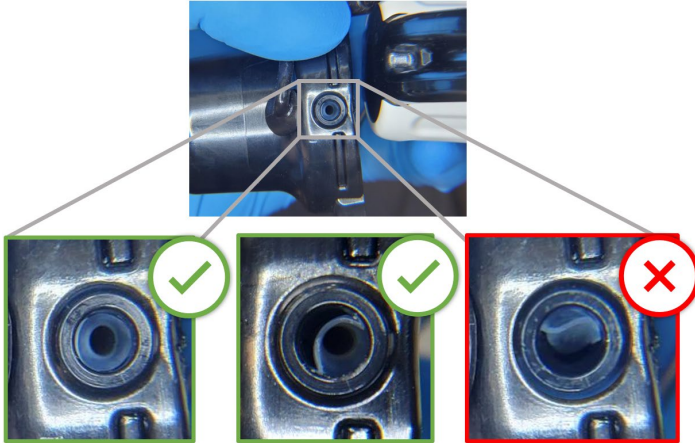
Proper location and geometry of Flush Tube in the top flush port.
